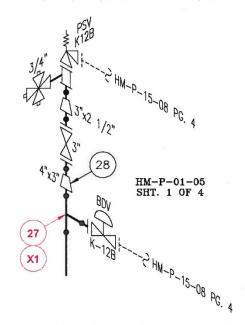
A partial view of isometric drawing HD-P-01-05, sheet 1 of 4. The location of profile radiography (X1) is shown in red.
